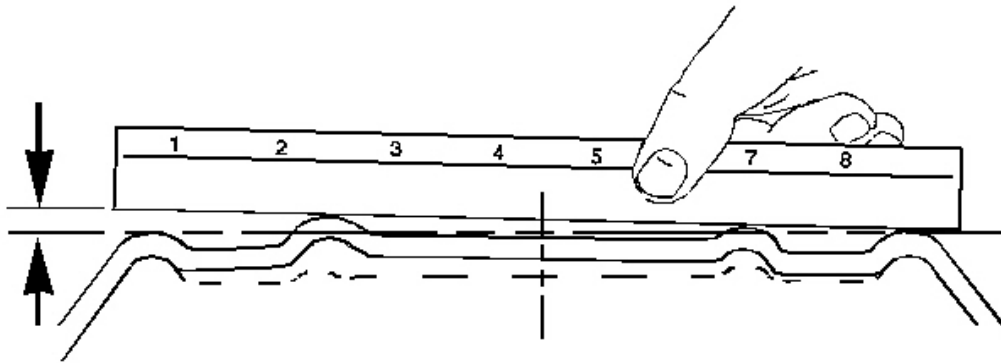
Inspecting Wheel Inboard Mounting Surface
